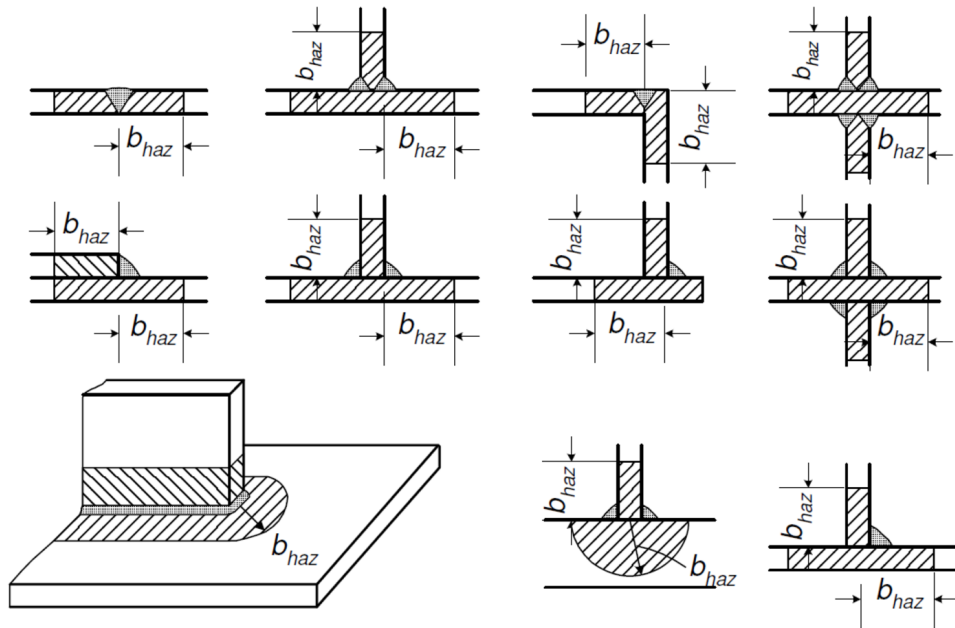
Extent of HAZ for different welding geometries [2].
